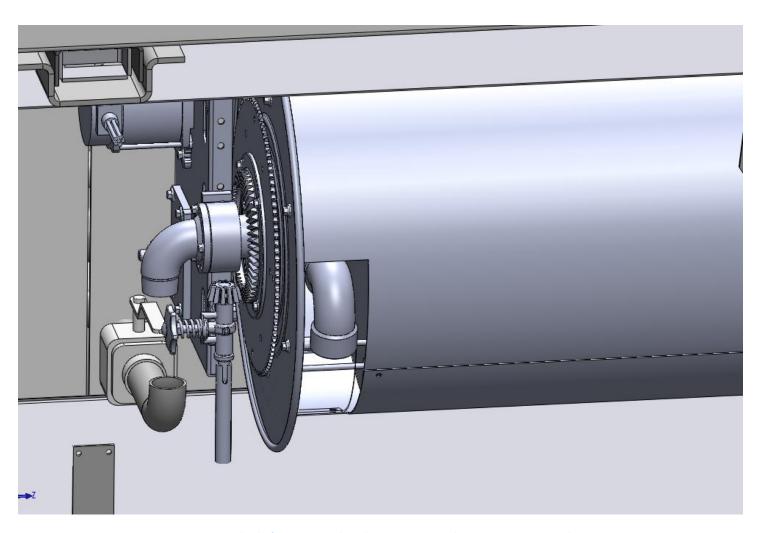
Valve before Hose Reel - will try to accommodate easier access to valve
